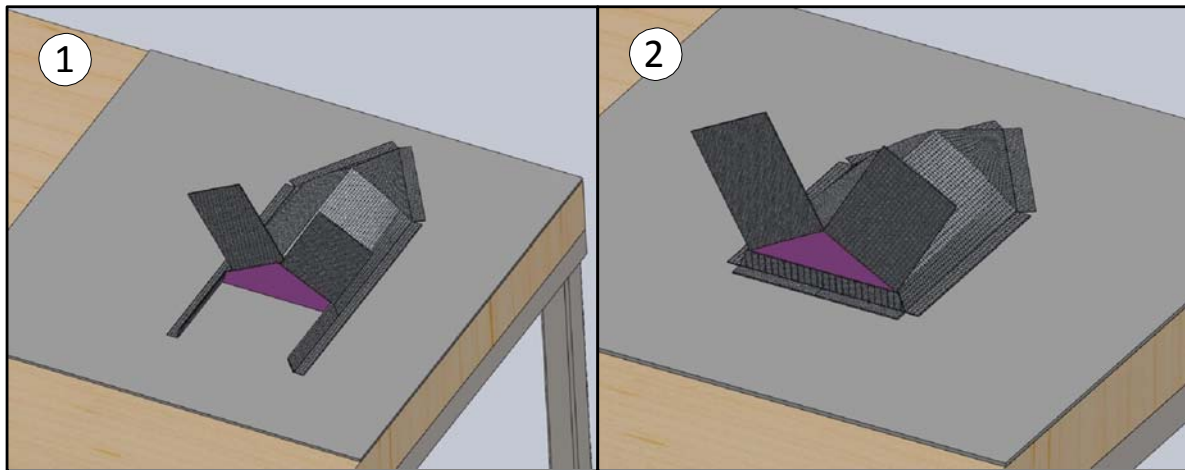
Preparing the stern- (1) Cut the stern matting into several pieces that can be folded over one another. (2) Fold the bottom pieces in first so they will be covered up by the bigger bottom flaps.
